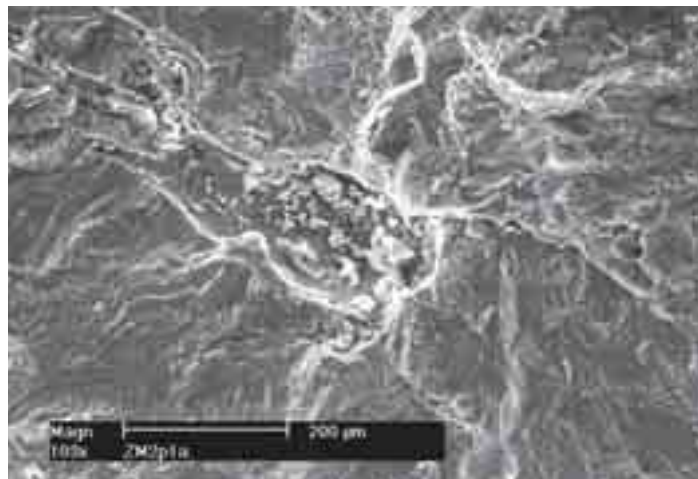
Part of the fatigue fracture zone from Fig. 5. Region of fatigue crack initiation (welding defect)
